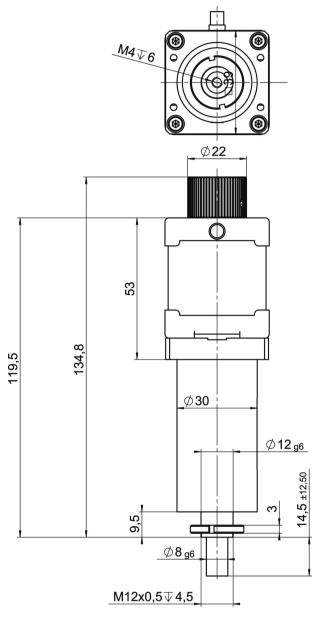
M-229.26S, dimensions in mm. Note that the decimal places are separated by a comma in the drawings.
